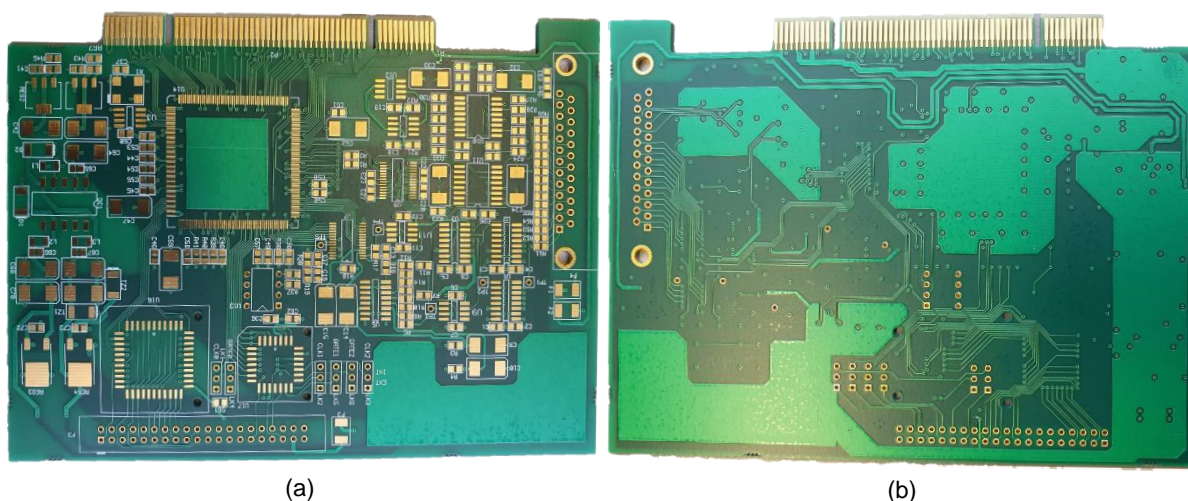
(a) Front view of PCB obtained from Trax Interconnect (b) Back view of PCB obtained from Trax Interconnect
